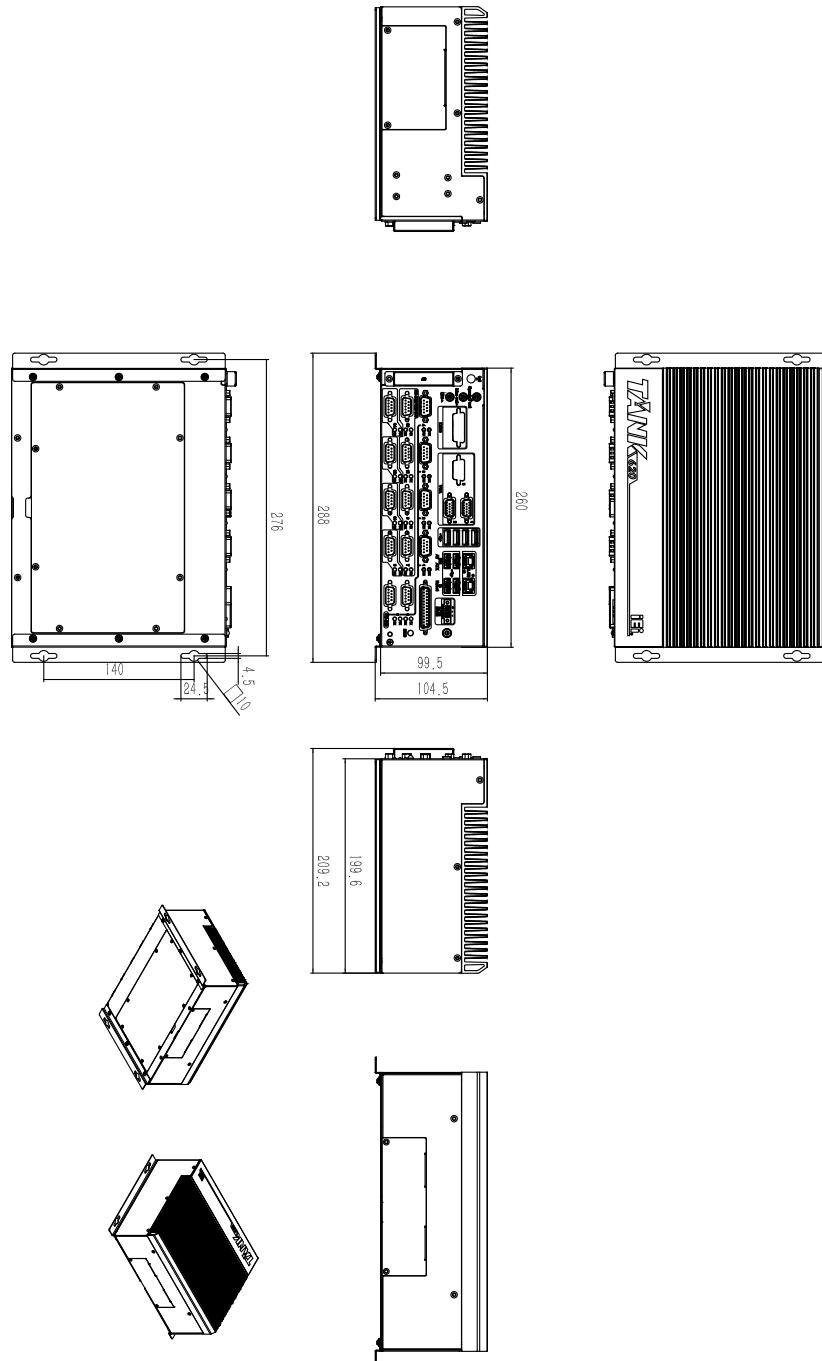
TANK-870AI slot Physical Dimensions (millimeters)
